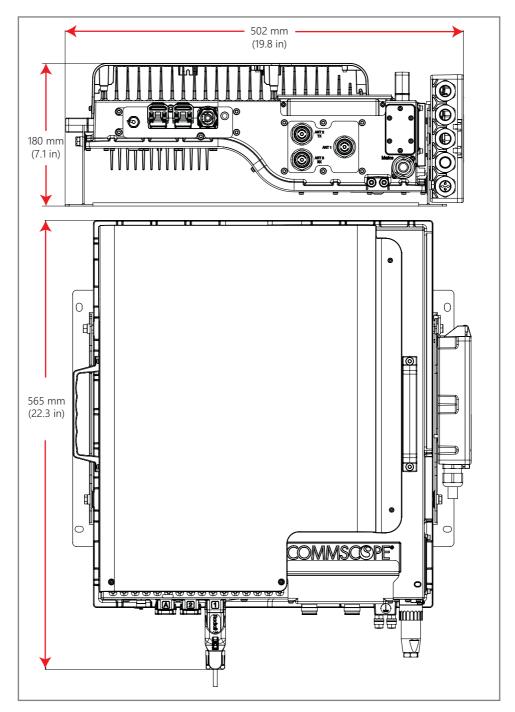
Mounting Dimensions with the Single Mounting Bracket
